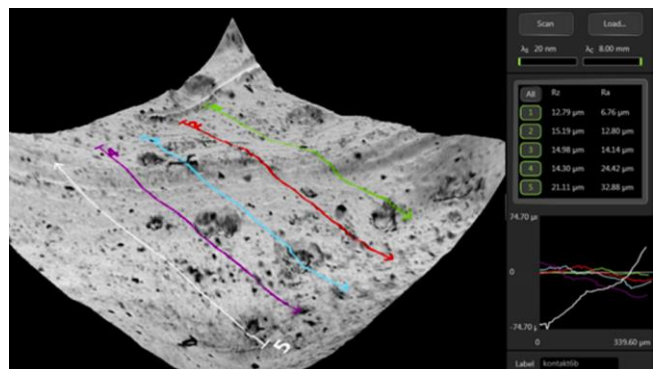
Sample number 3, measurement 2 – 3D view of the test surface
